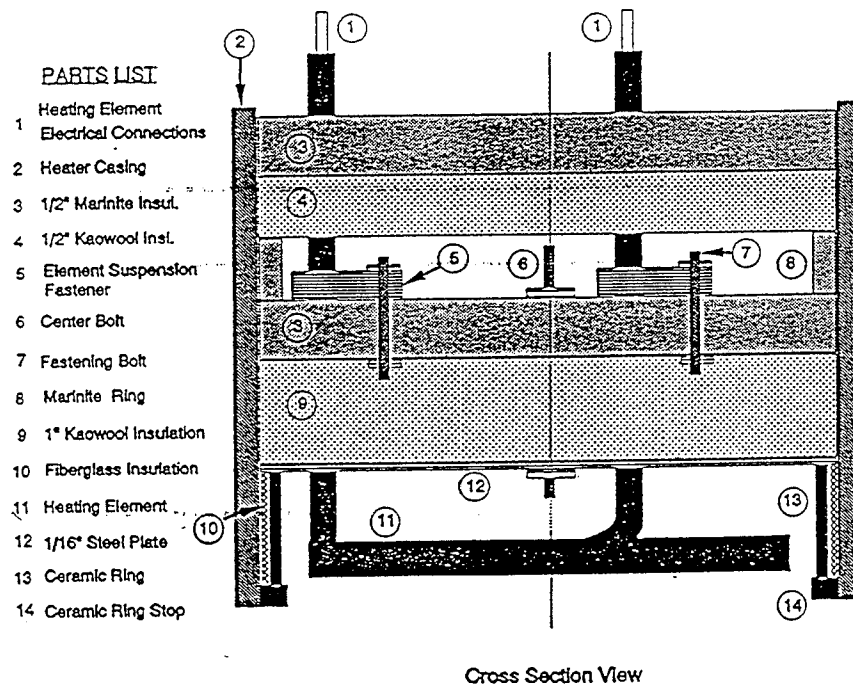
Modified NIST Smoke Chamber Heater Assembly
